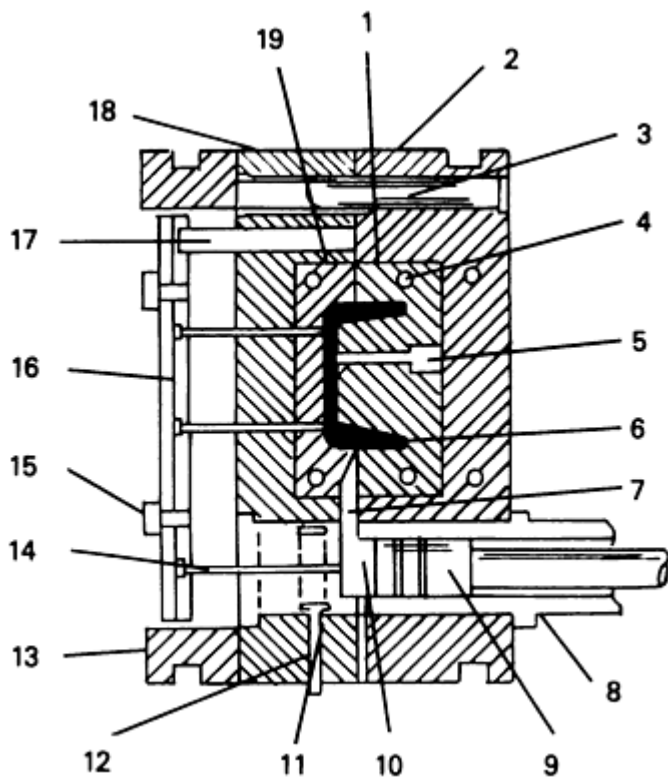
A typical die-casting die. (1) Fixed-half tool insert, (2) fixed-half tool holder, (3) guide pin and bush, (4) water cooling, (5) fixed core pin, (6) casting, (7) runner, (8) shot sleeve, (9) plunger tip (in forward position), (10) slug, (11) slug cooling, (12) water inlet, (13) ejector box, (14) ejector pins, (15) ejector plate stop, (16) ejector plates, (17) ejector plate return pin, (18) moving-half tool, (19) moving-half tool insert. Source: Ref 20
